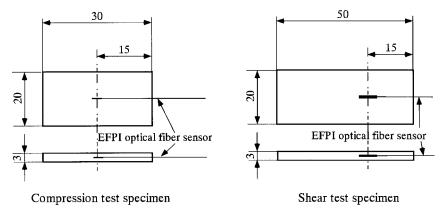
Shape and dimensions of the compression and the shear test specimen.
